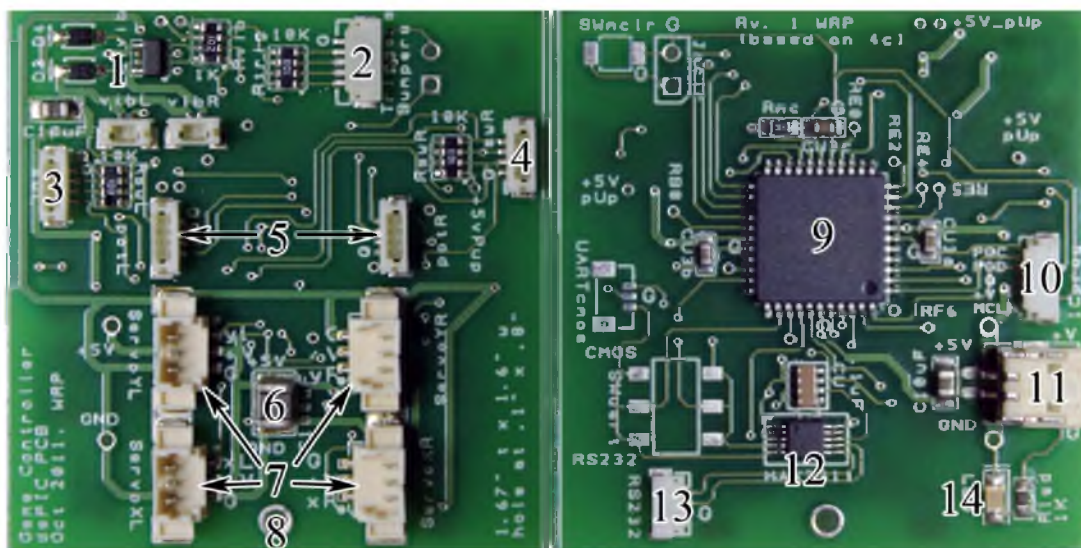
Top and bottoms of front-tactor controller PCB. (1) Vibrotactor power/control components (2) Trigger and bumper header (3) Left side switch header (4) Right side switch header (5) Potentiometer headers (6) 100  $\mu$ F filter capacitor (7) Servo headers (8) Mounting hole (9) Microcontroller (10) Programming header (11) Power header (12) Max3311 (13) RS-232 communication header (14) Power LED
